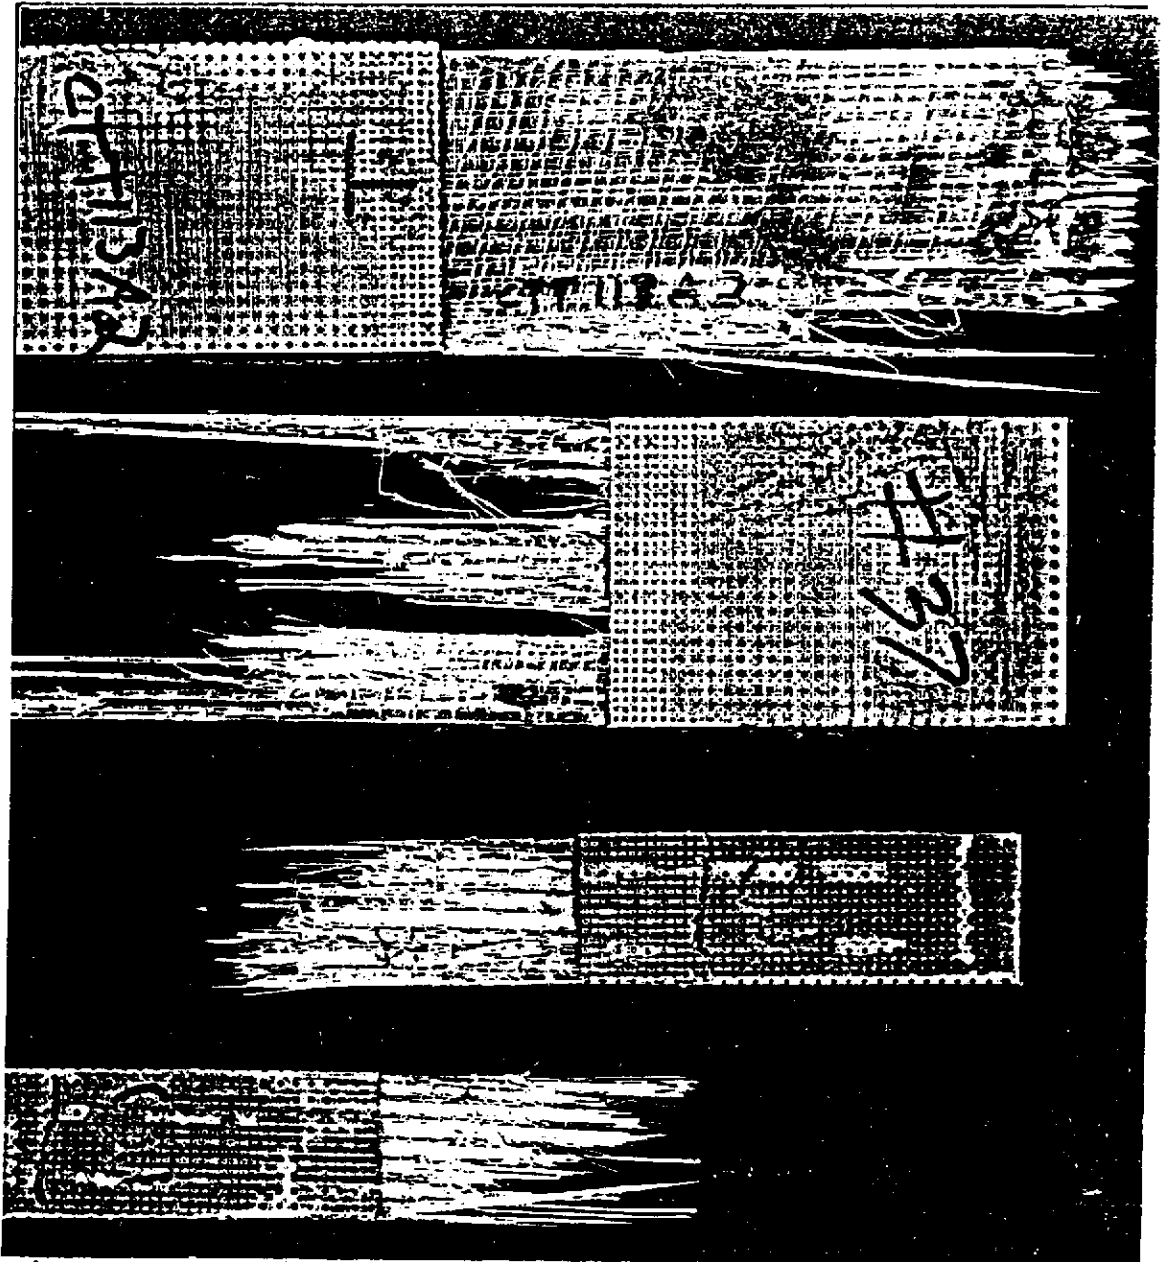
Typical Failure of Material A, 1 and 2 inch wide Test Specimens.
